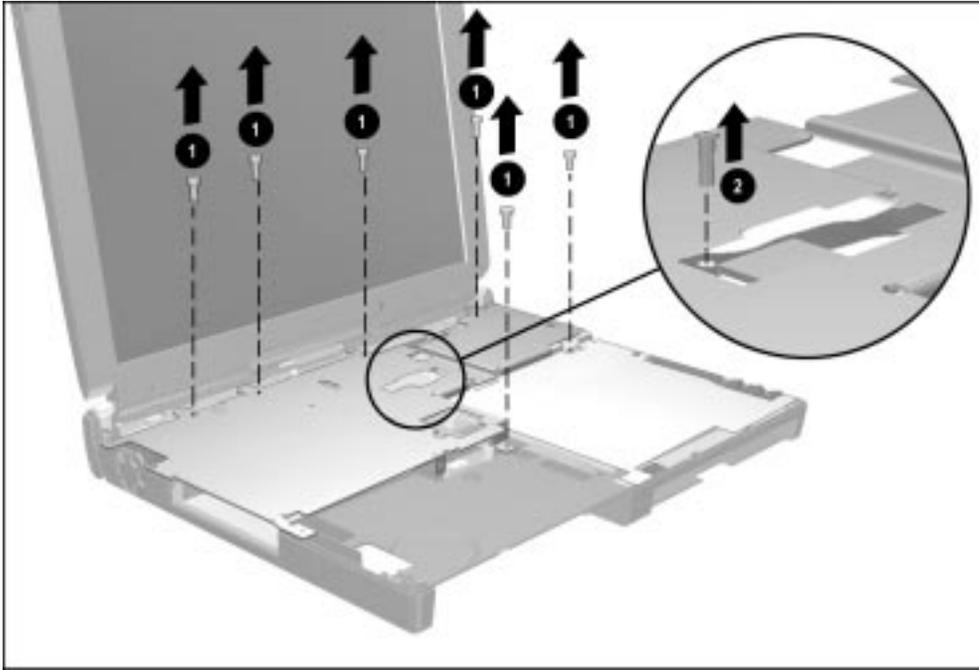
Removing the Heatpipe Mount Leaf Spring and EMI Shield Screws
